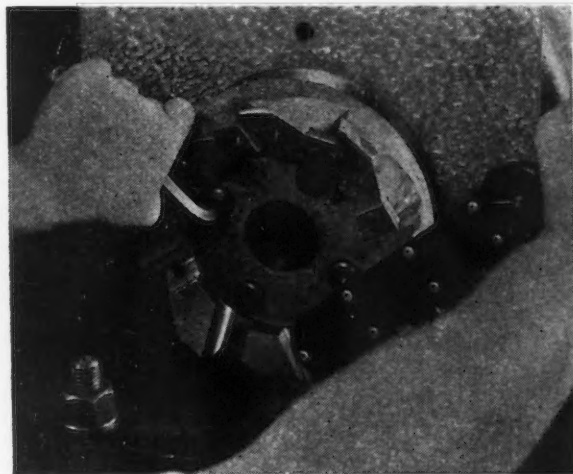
To complete the operation of setting up, the set-screws are tightened with a torque wrench to a 300 in. lb torque.
